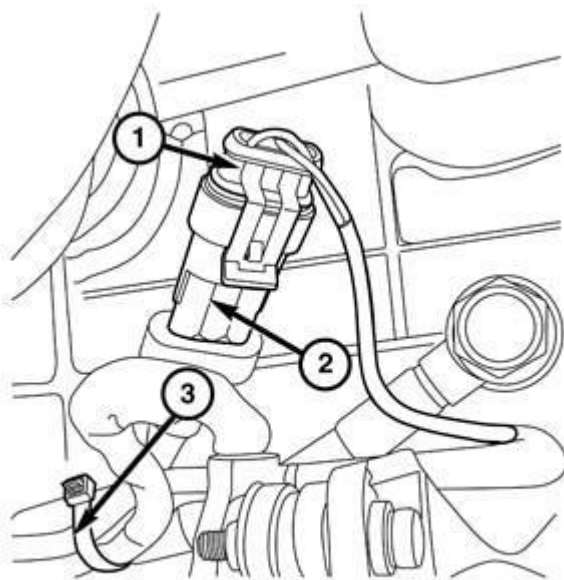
Speed Sensor Wire Harness Connector, Speed Sensor & Cable Tie
